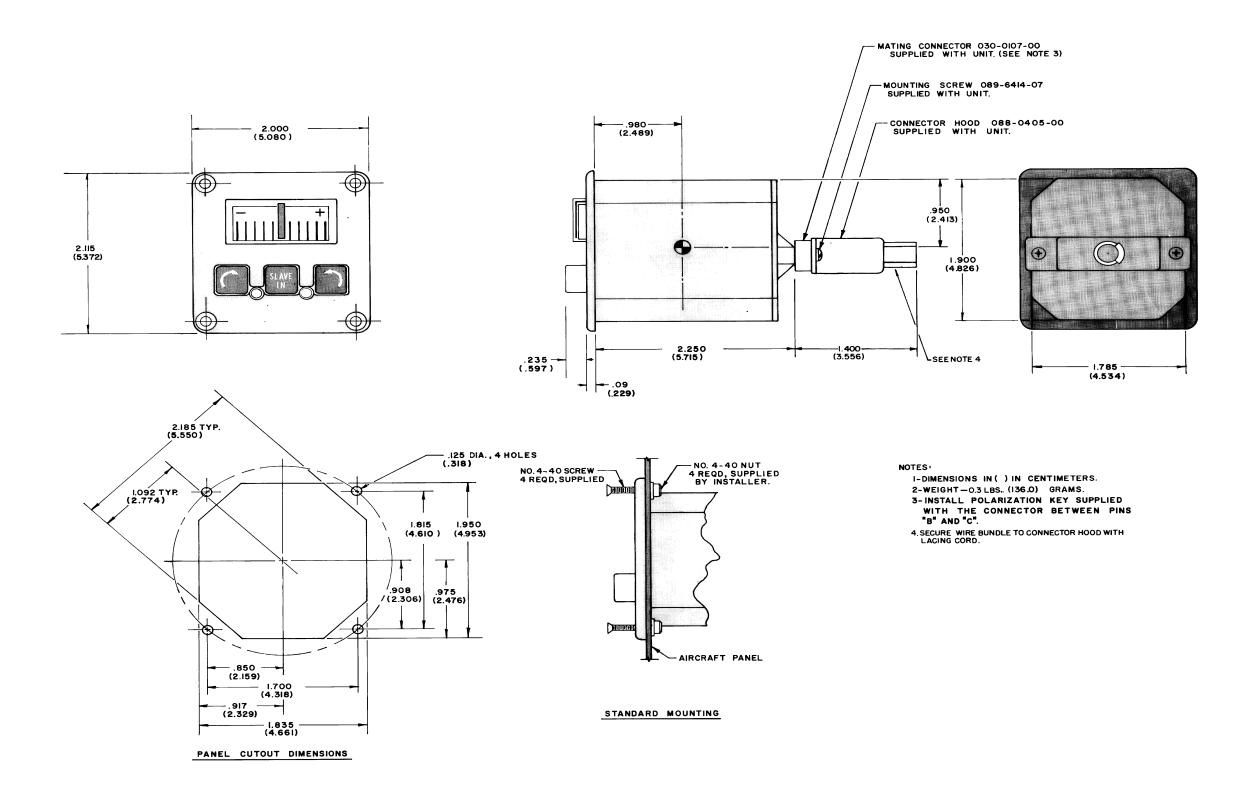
KA 51 INSTALLATION DRAWING (Dwg. No. 155-05144-0000, R-1)
